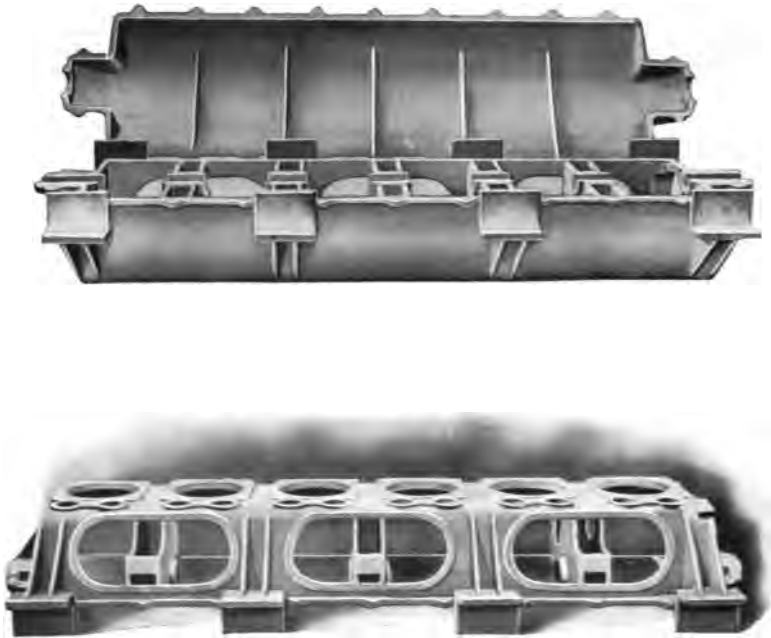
TWO VIEWS OF A SIX CYLINDER CRANK CASE.
